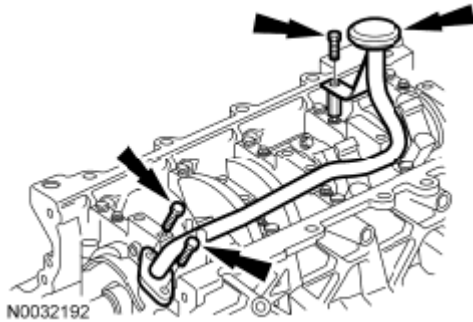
Locating Oil Pump Screen And Pickup Tube Bolts
